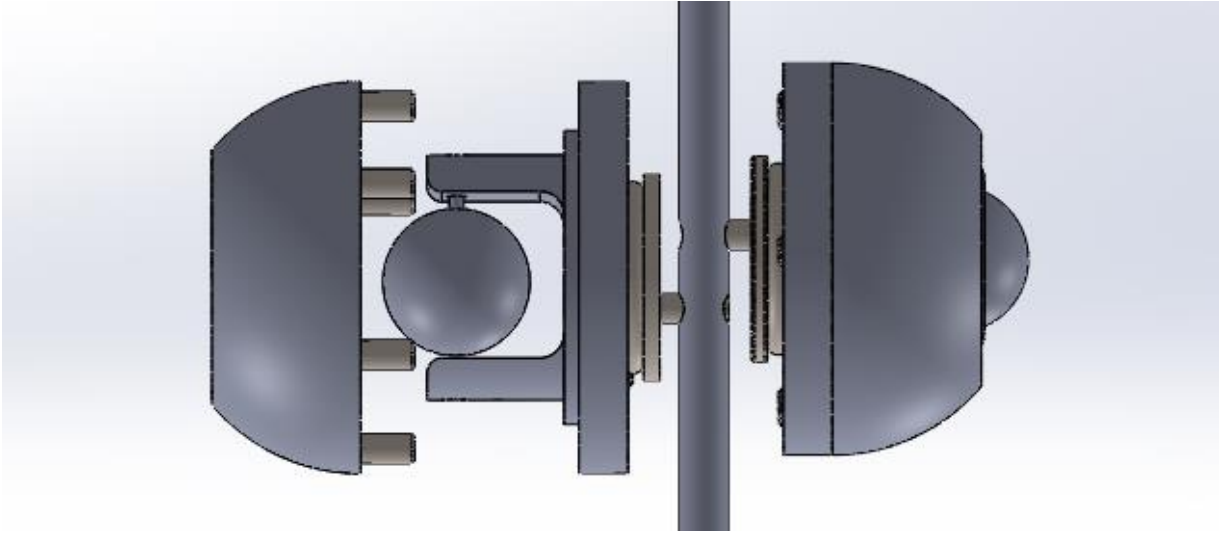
CAD Model of Prototype I of Wheel (Split View)
